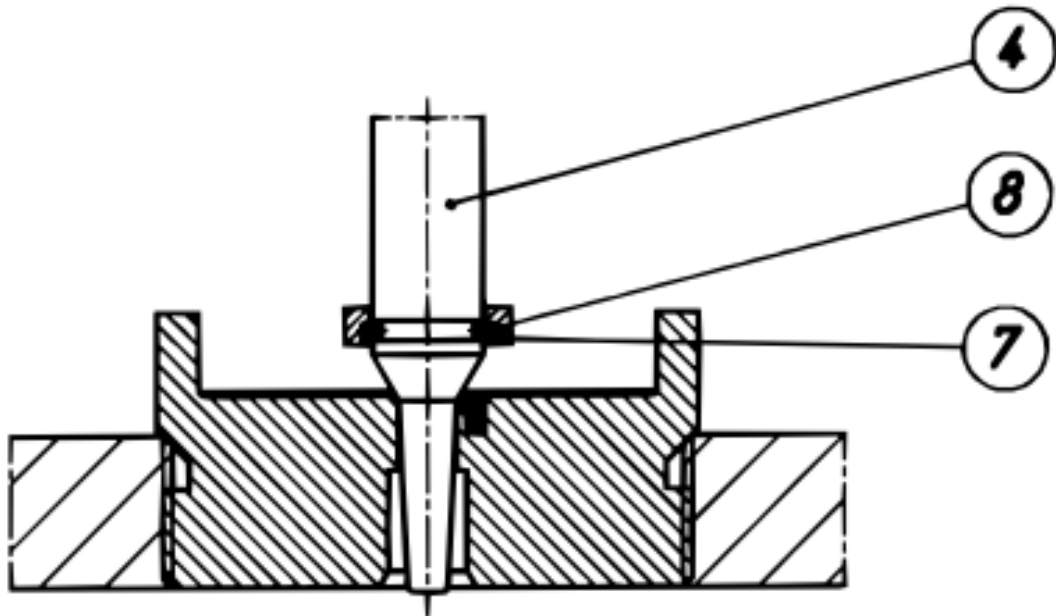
Spindle with valve block $Kvs = 0.01... 1$ with standard seating
